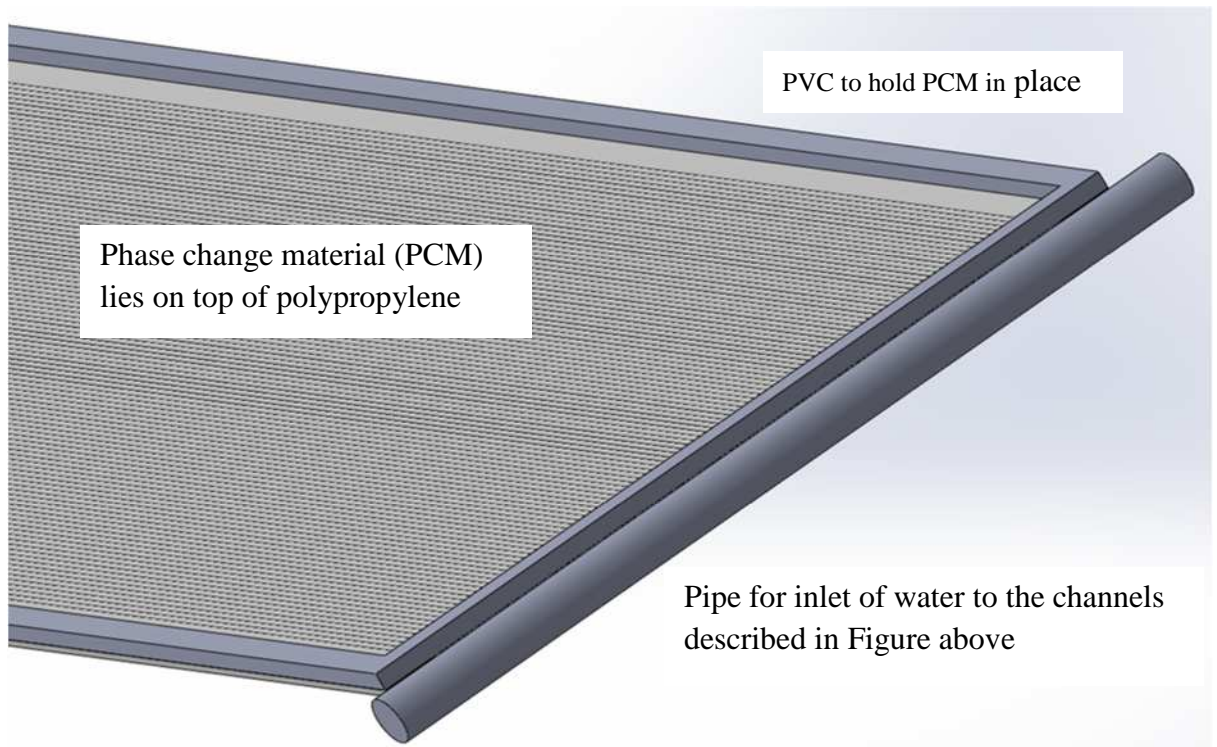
8: Drawing of the assembly of the polypropylene sheet.
